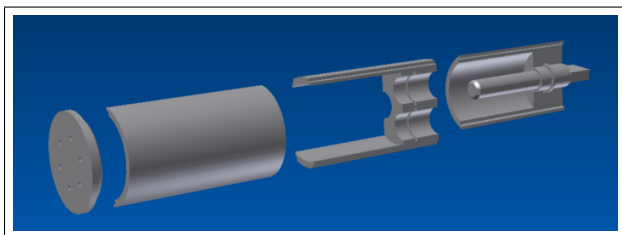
Step two of the manufacturing process – molding the final module cylinder with braided core rods inside
